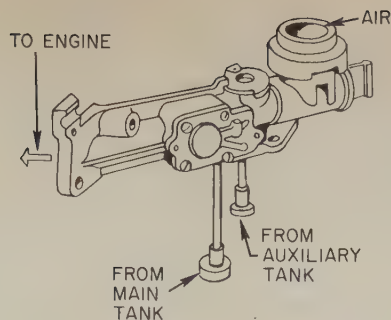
Exterior view of a suction-feed carburetor with a diaphragm. (Briggs & Stratton Corporation)
